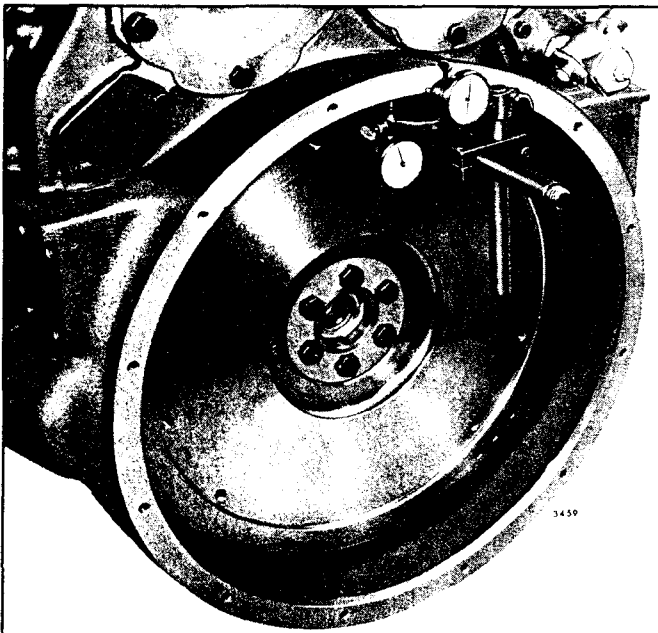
Checking Flywheel Housing Concentricity with Tool J 9737
